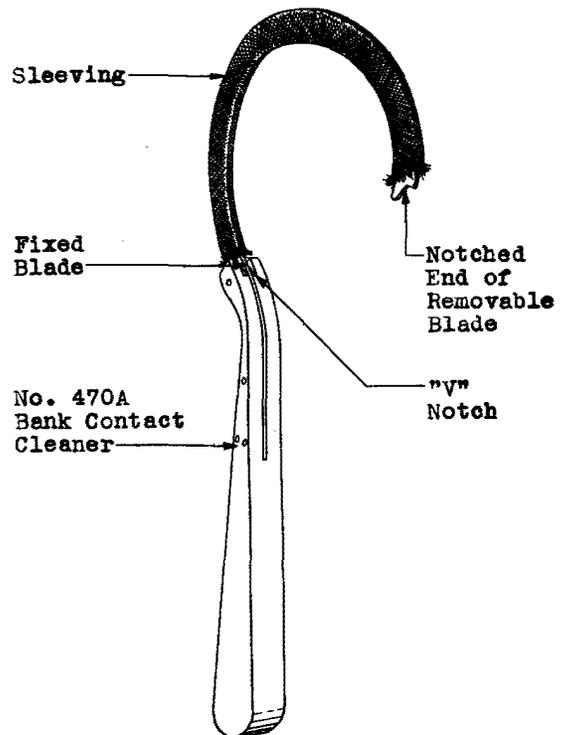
Removing Sleeving From No. 470A Bank Contact Cleaner
